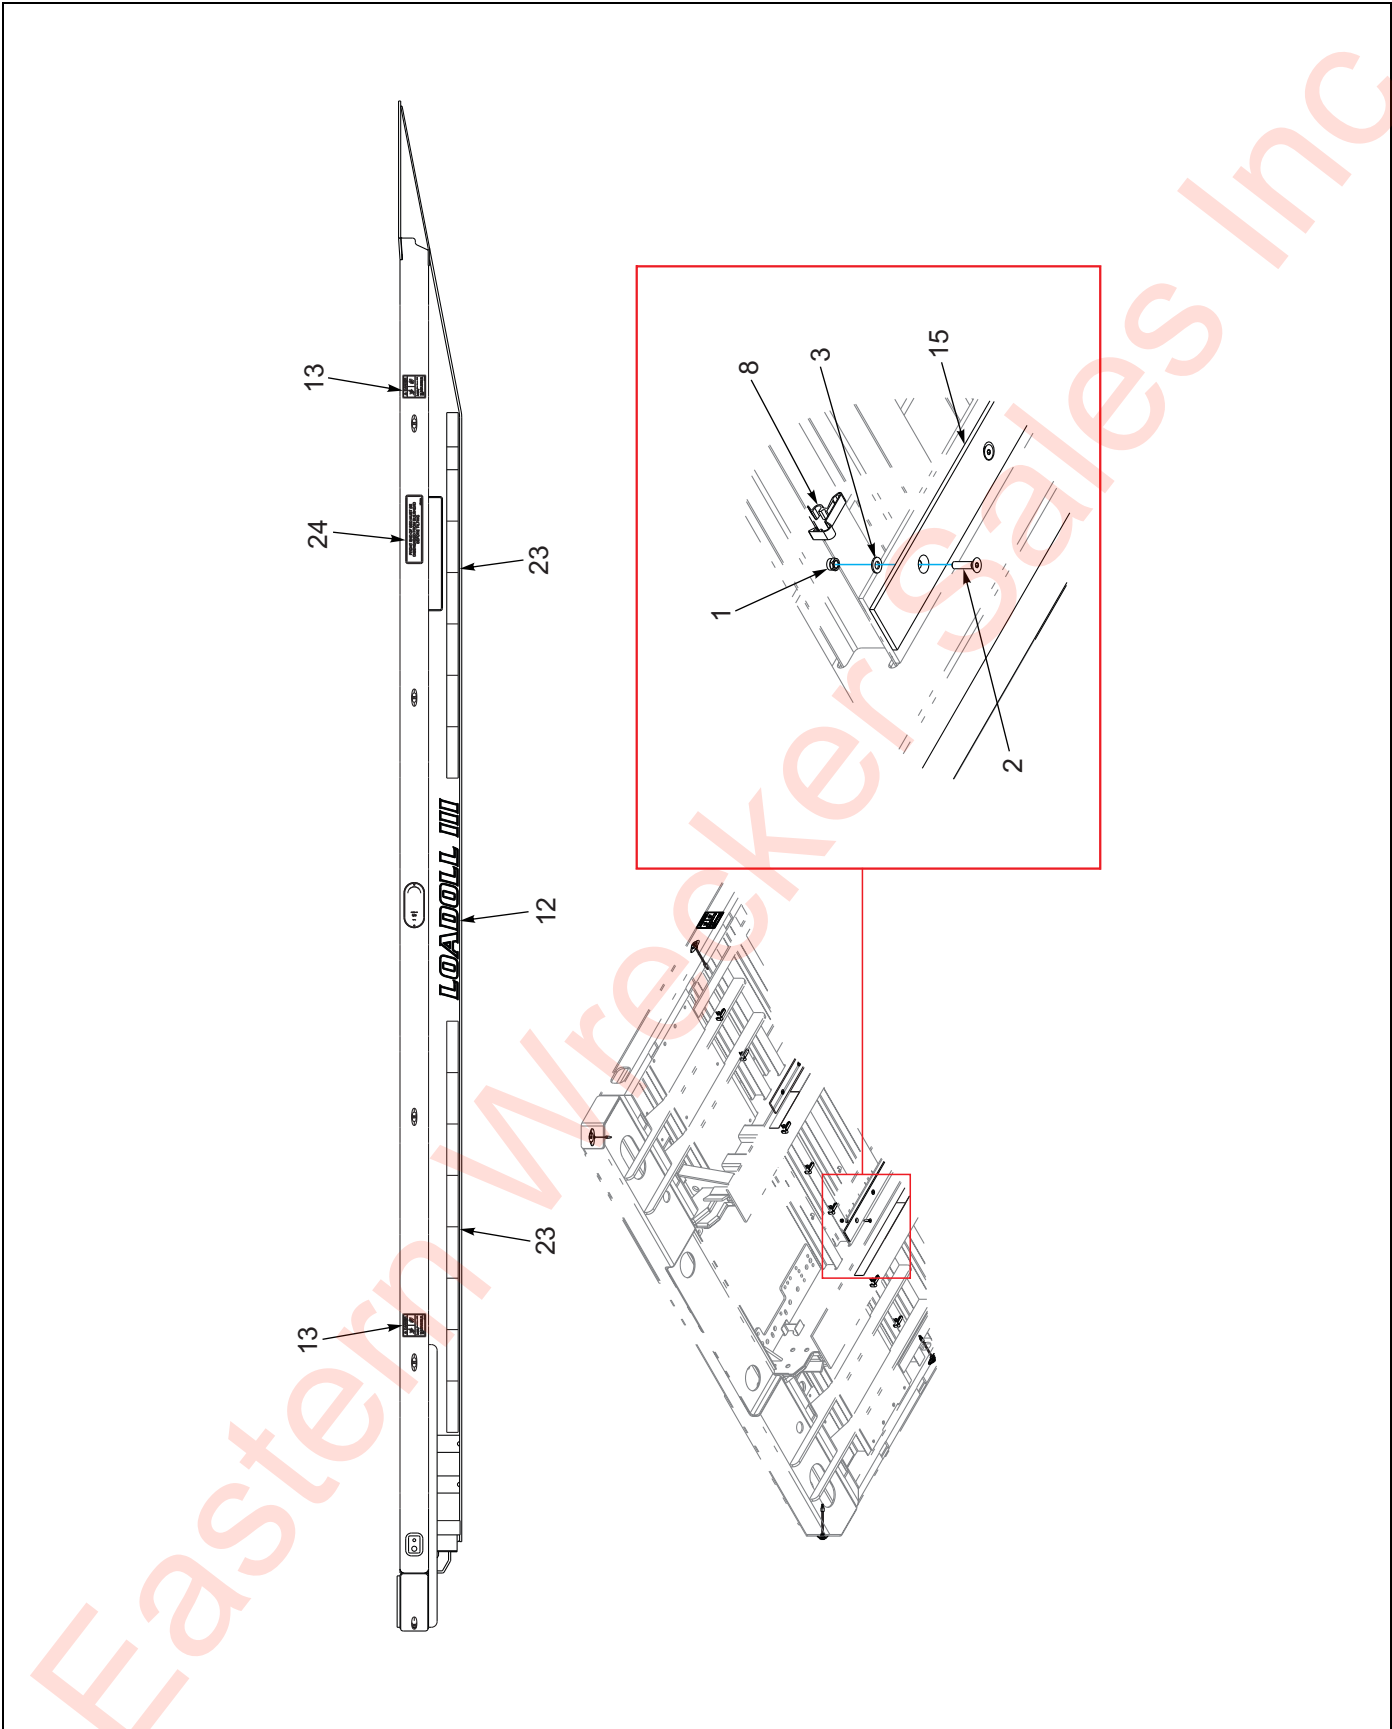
Short Bed Frame Assembly (1 of 2)
